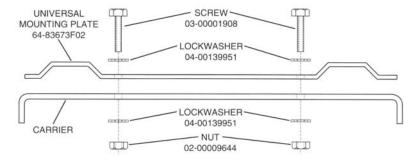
Universal Mounting Plate Installation (Part of Radio Enclosure Kit)
